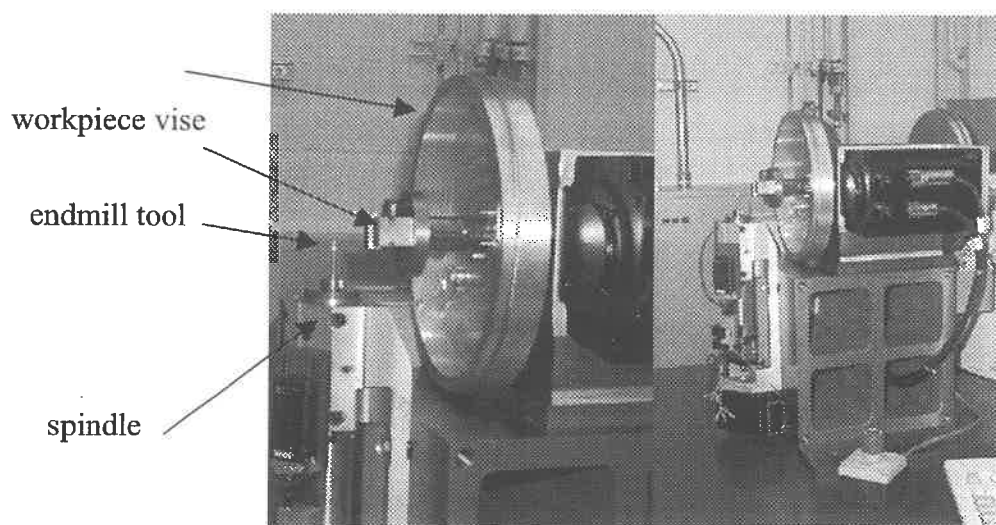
(a) and (b), Photos of the prototype three axis rotary milling machine tool (enclosure removed)
